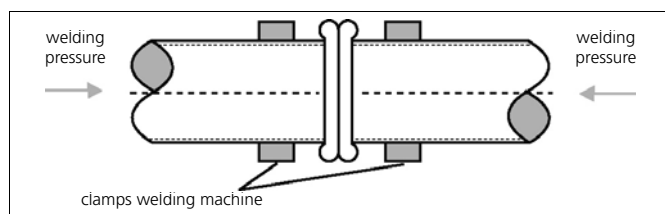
Welding / cooling a pipe or fitting
